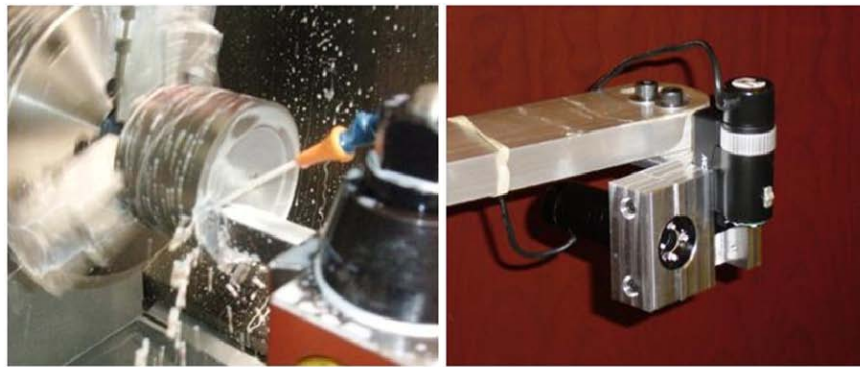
(Left) Tool Wear Testing (Right) Digital Microscope Cameras
